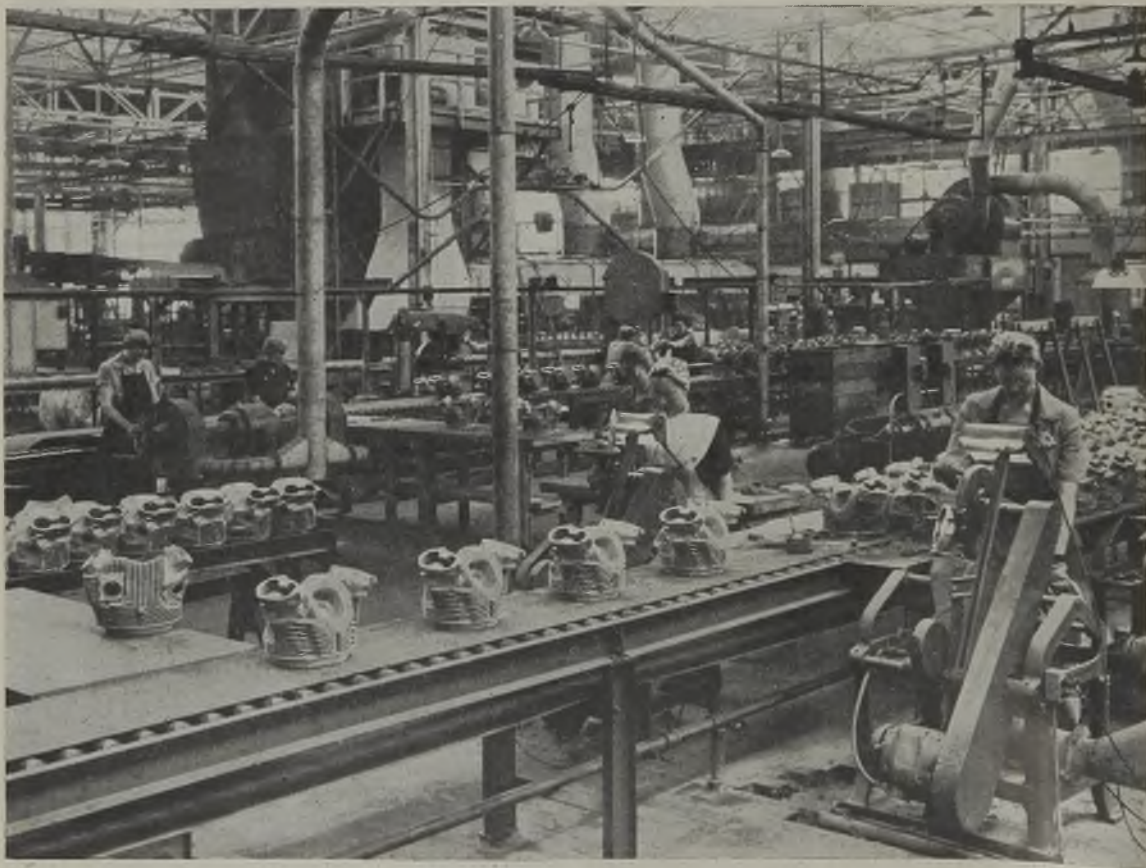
SPECIAL MACHINES ARE USED FOR GRINDING OUT THE METAL FINIS.
